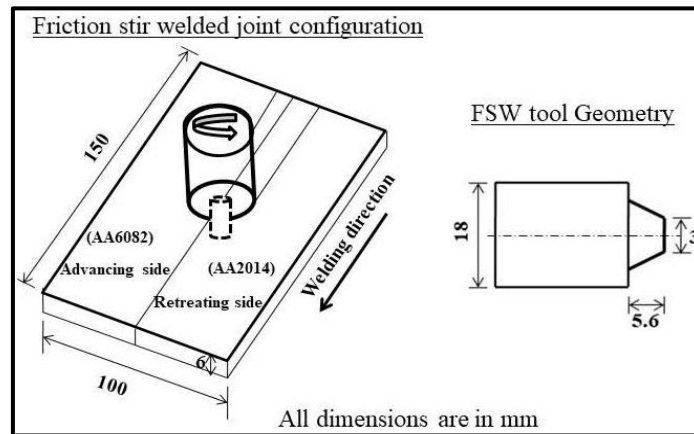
Configuration geometry of FSW of AA2014 and AA6082 weld
